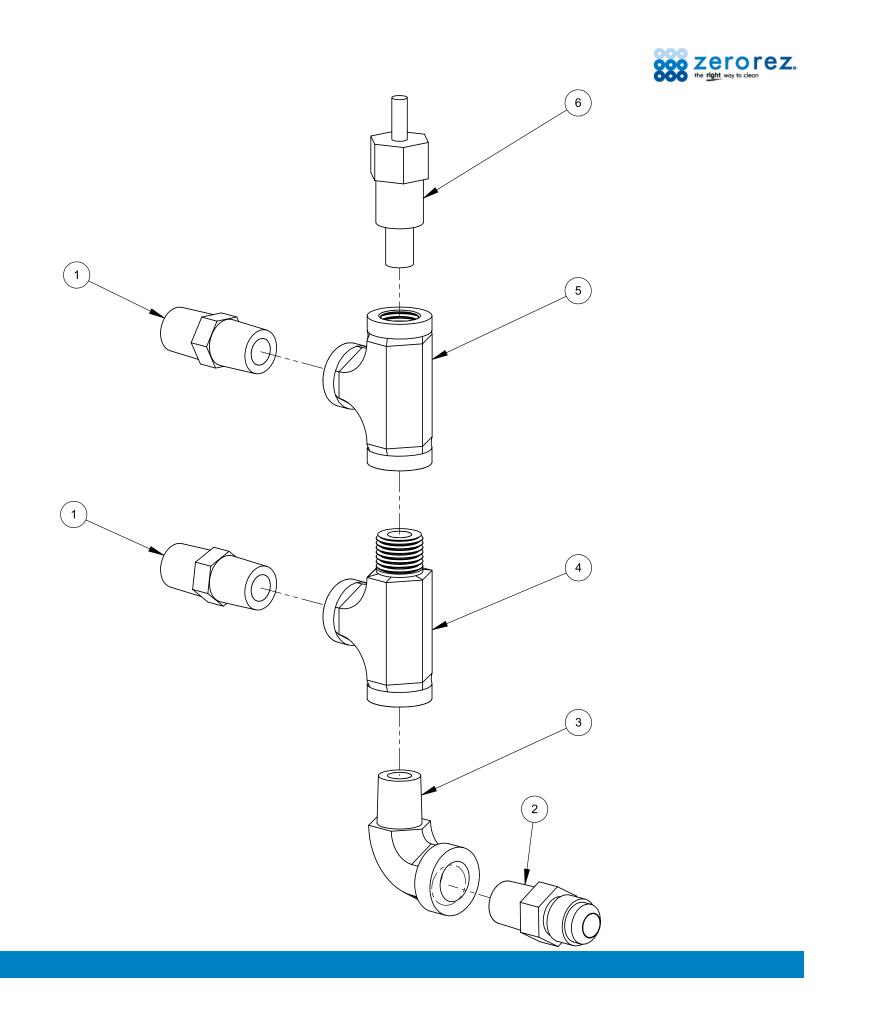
Hi-PSI Manifold Assembly 601-008-741 Rev. C
